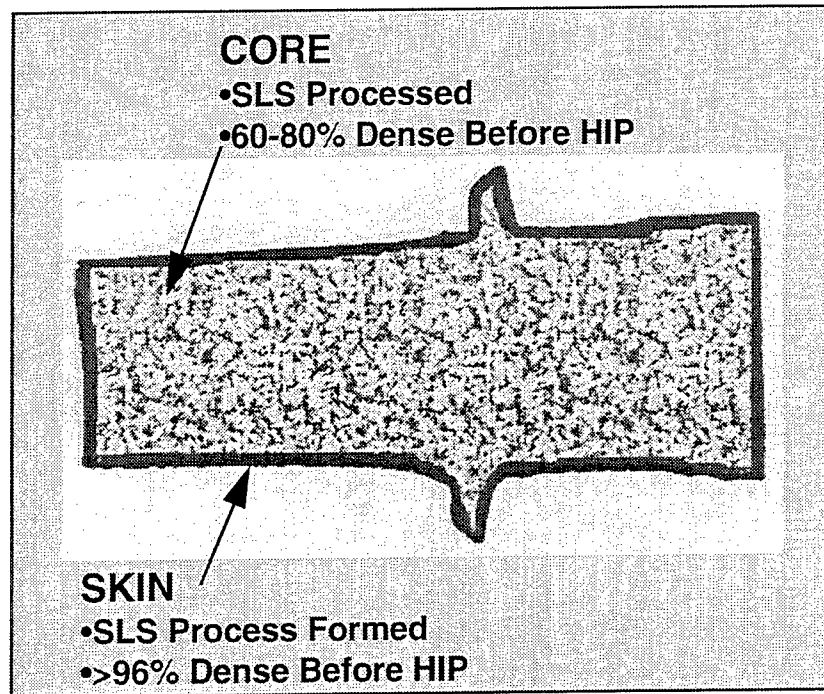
Selective Laser Sintering Concept for Powder Metal HIP Parts
